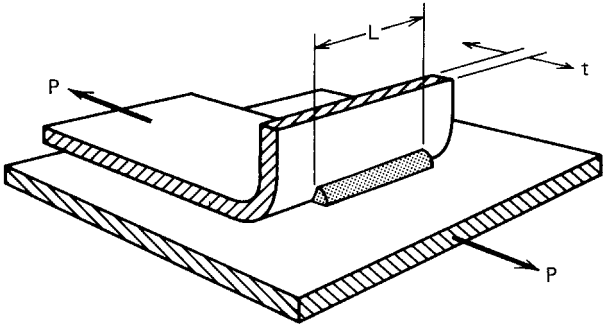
Transverse flare bevel weld.^{1.314}
